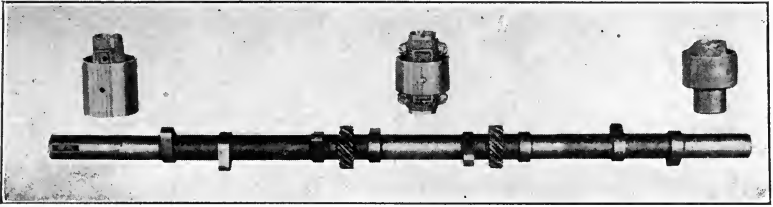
Typical Cam Shaft with Valve Lifting Cams and Gears to Operate Auxiliary Devices Forged Integrally.
